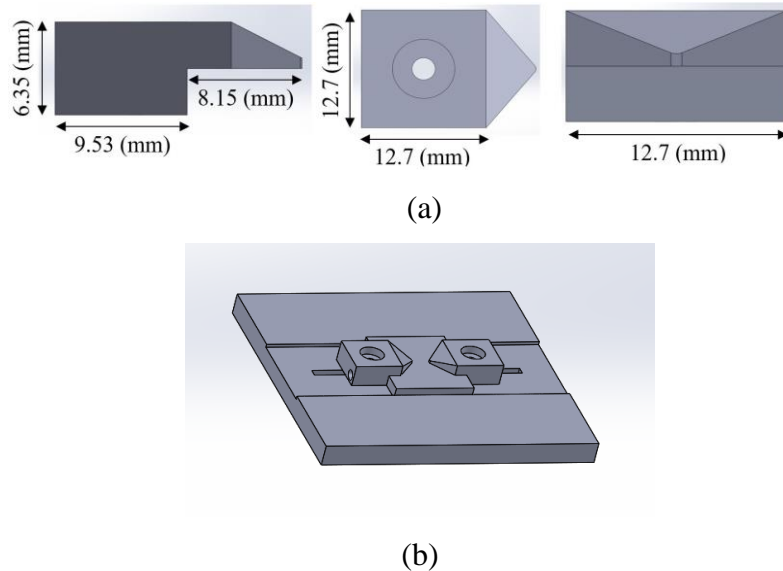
Schematics of (a) dimensions of electrode (b) sample bed assembly
